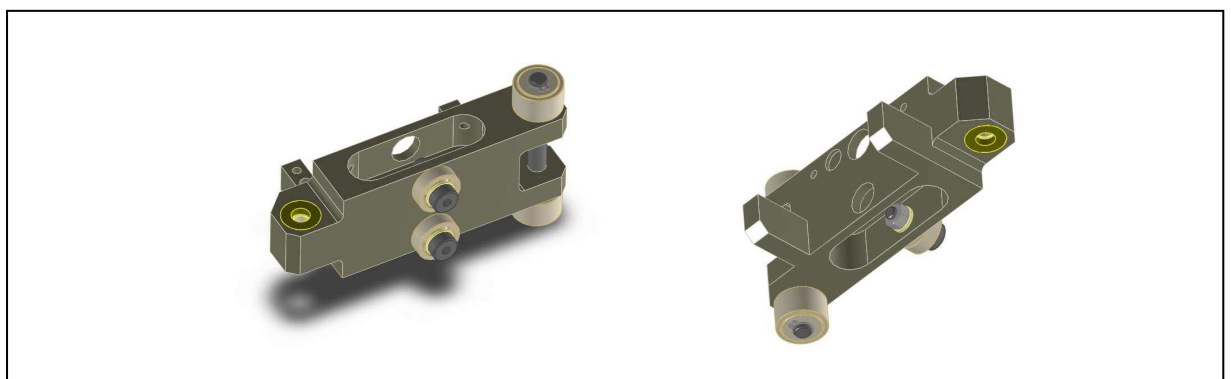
Universal chain links with 4-fold bearing support. Very robust, CNC machined from billet alloy aluminum
